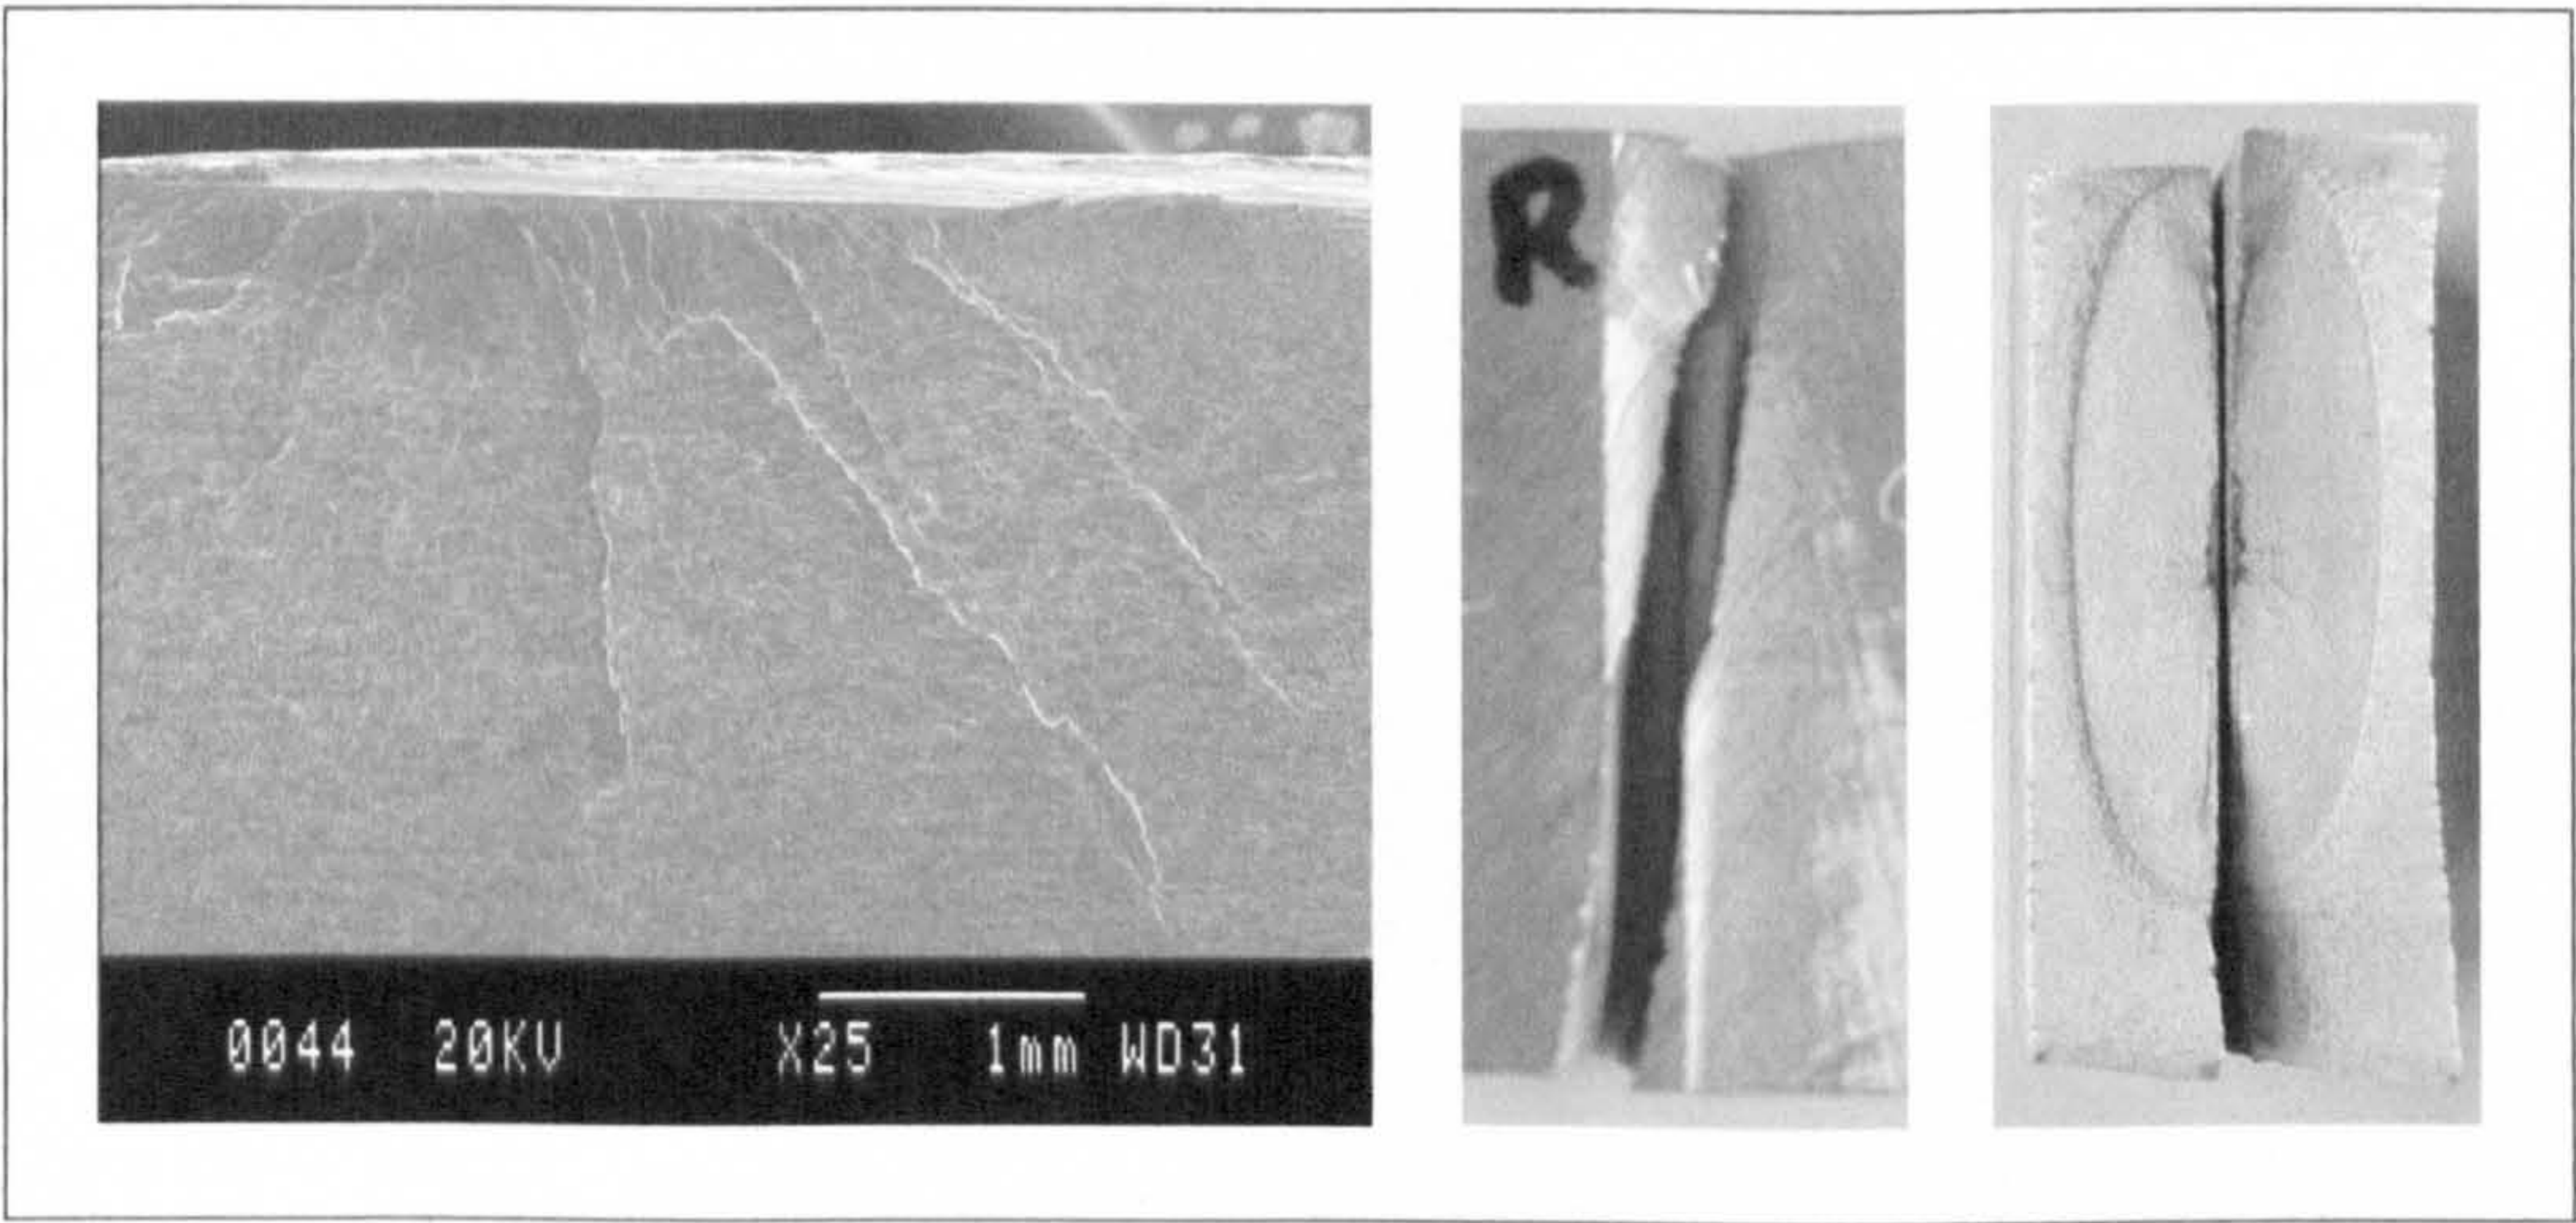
Multiple initiation sites (left), fracture path (centre), fracture surface (right), (FS DP 7).
